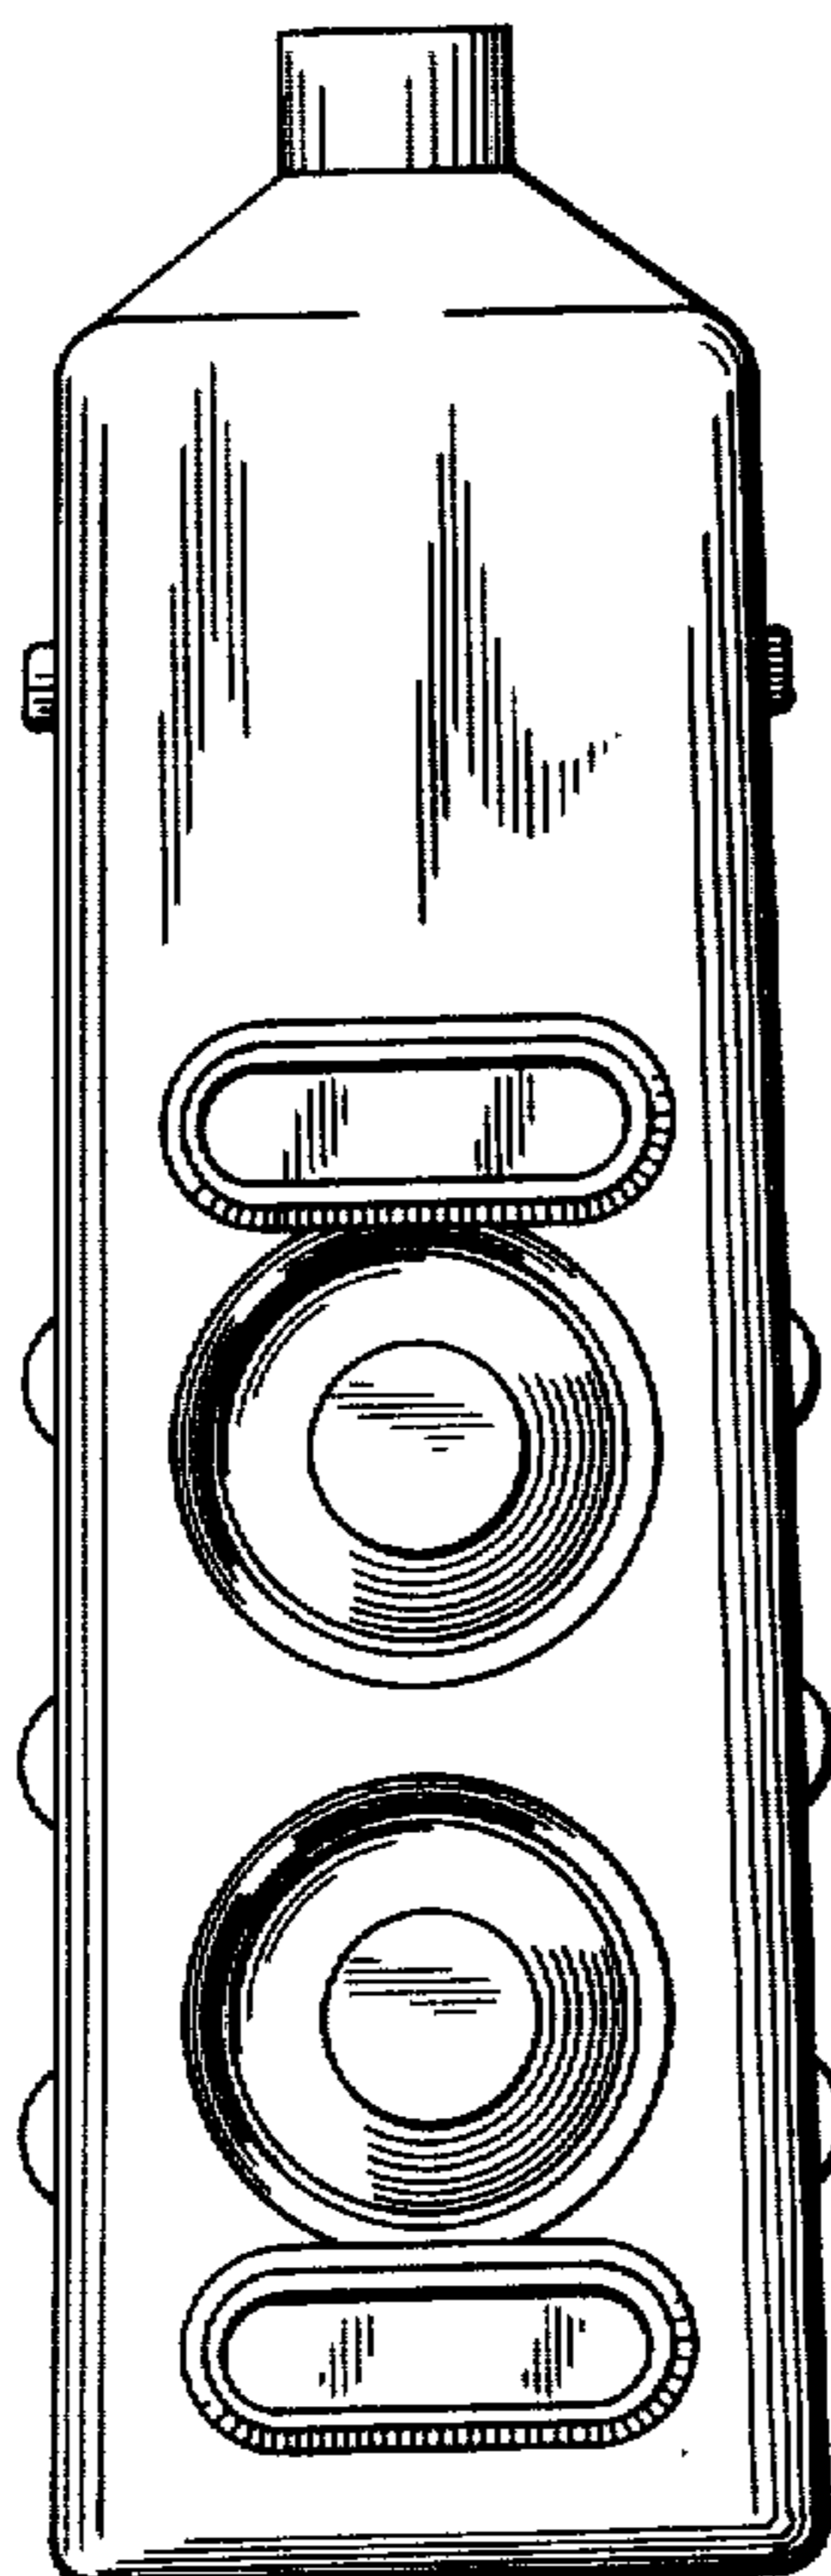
is a right-side elevational view of the electrical switch of FIG. 1.
